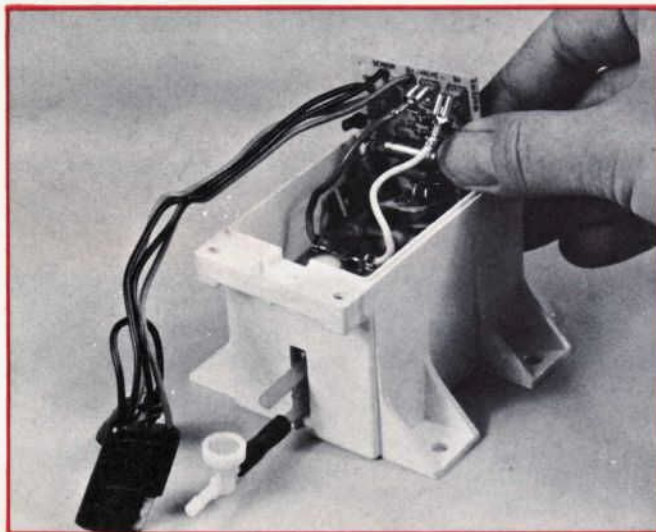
The Electronic Control Module with the Printed Circuit Board and Control Amplifier Revealed
